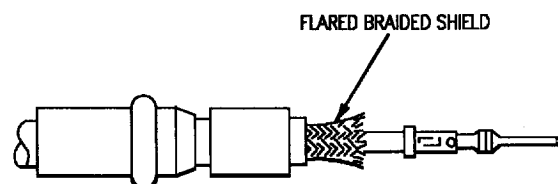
0N089558-2 Coaxial Assembly Procedure (Sheet 1)
